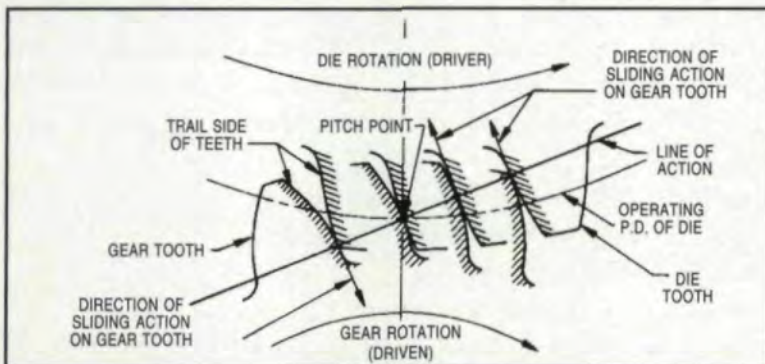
Contact action between the tooth of a work piece and the trail side of a rolling die tooth.
